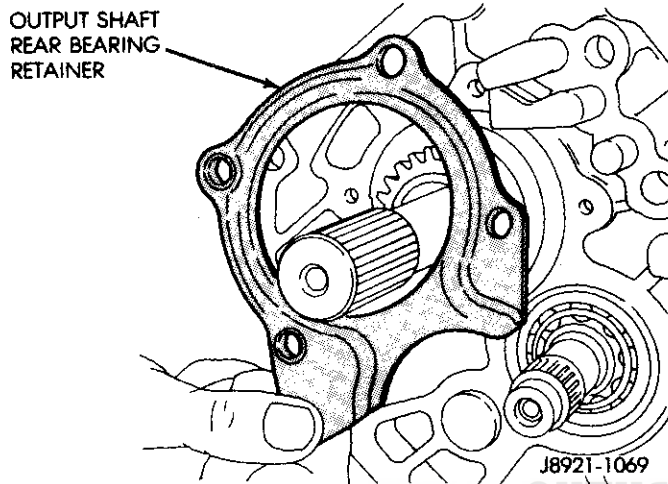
Removing Output Shaft Rear Bearing Retainer
